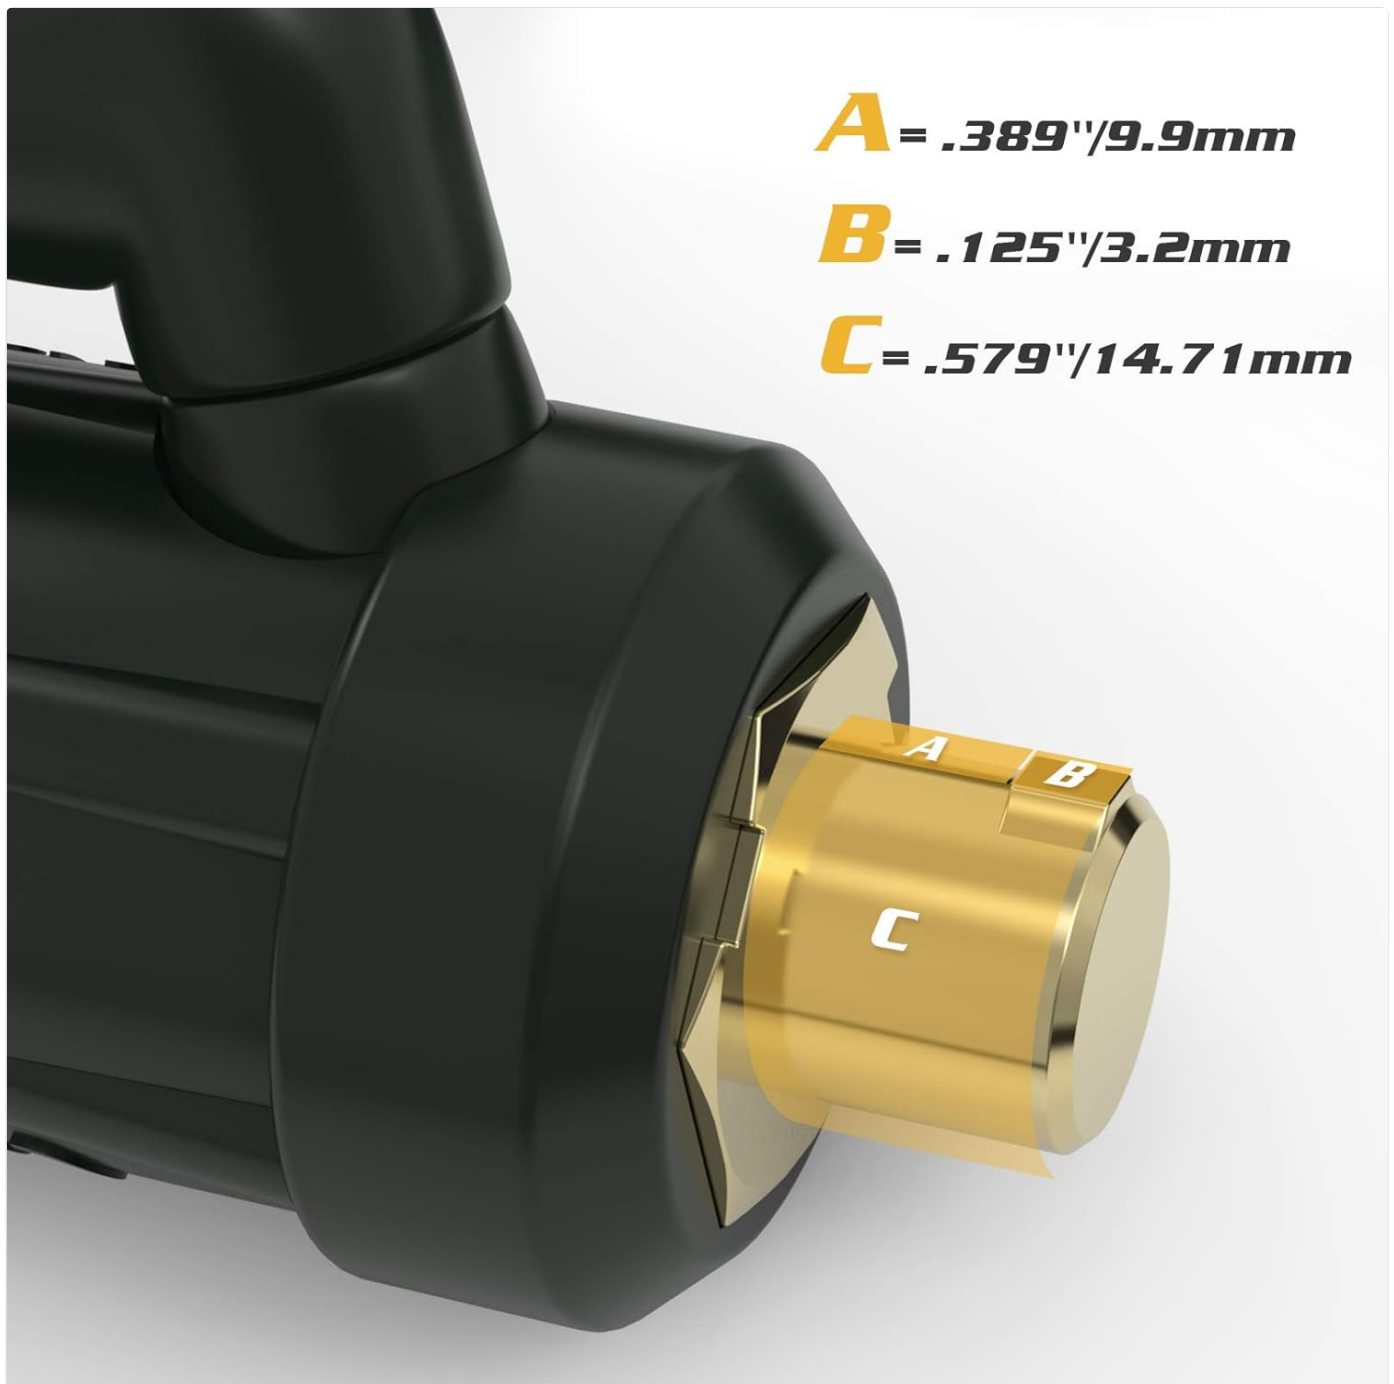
Detailed view of the torch connection, highlighting key dimensions for proper fitment.
